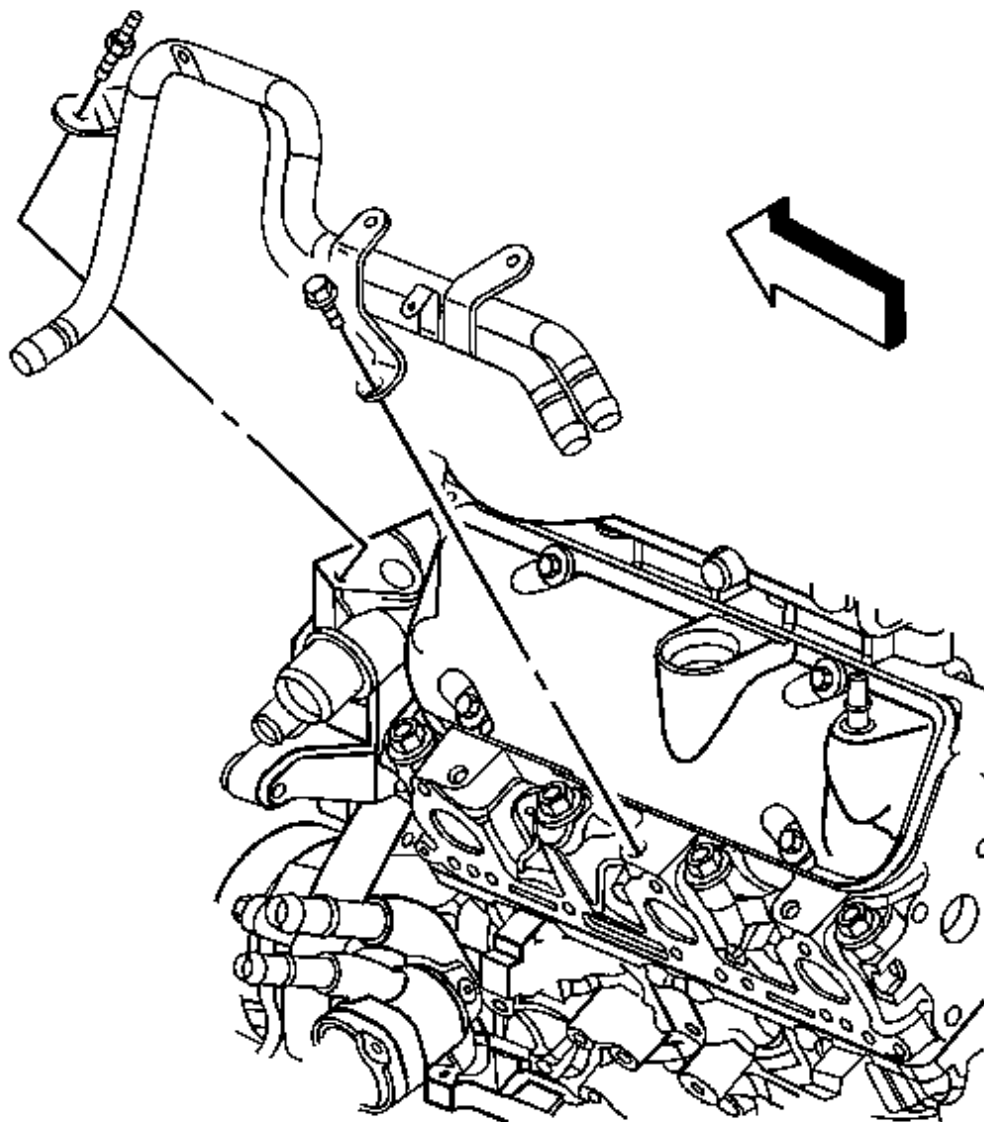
Locating Heater Inlet & Outlet Pipe To Vehicle
